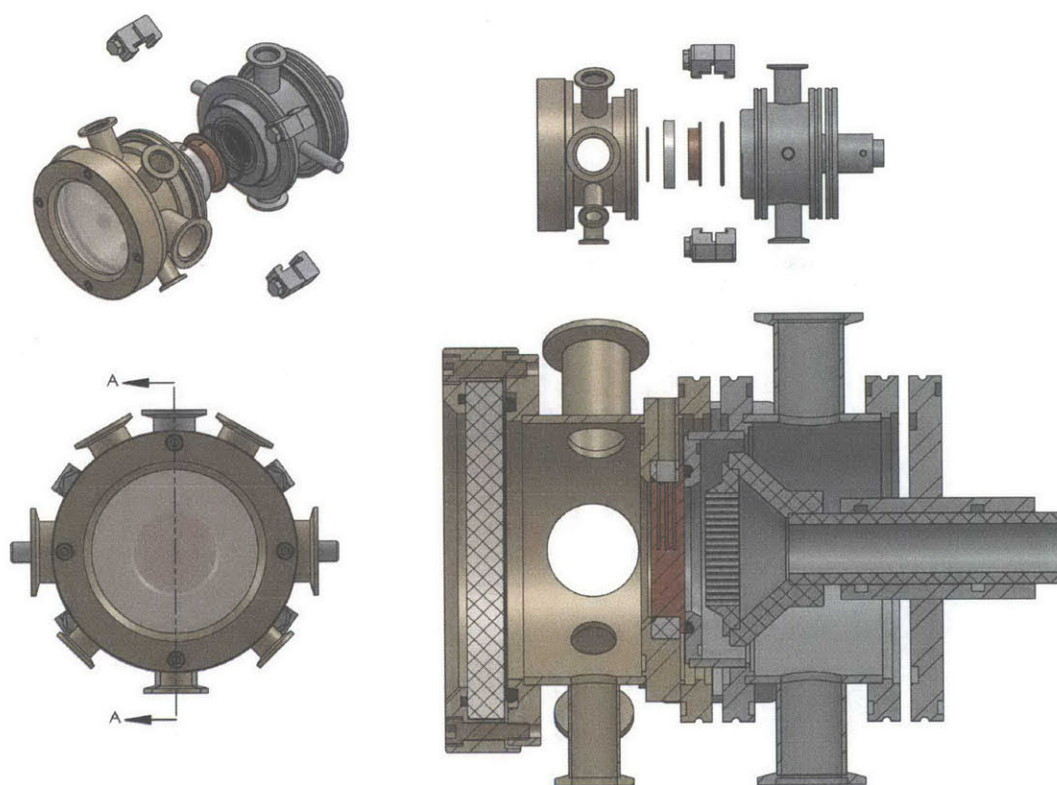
Steam and coolant chambers. Steam and condensing portion shaded in gray, coolant portion shaded in blue. (a) Isometric exploded view of chamber with sample subassembly and four claw clamps. (b) Side exploded view of chamber showing assembly sequence of sample puck and insulation with o-ring seals. (c) Front view of chamber showing port configuration. (d) Section view A-A showing seal detail and design of coolant and sample inspired by Koch and Leipertz.
